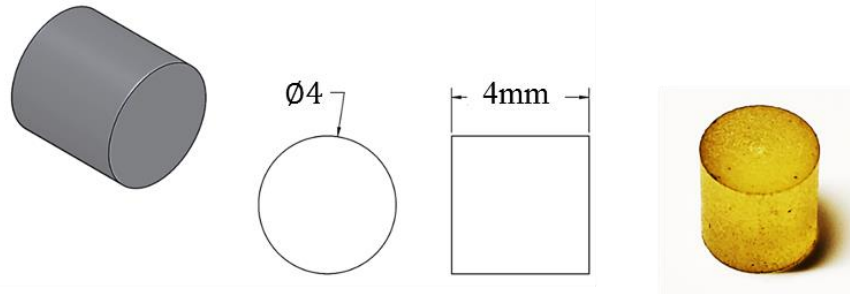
Specimen dimensions for the C-PSHPB tests.
